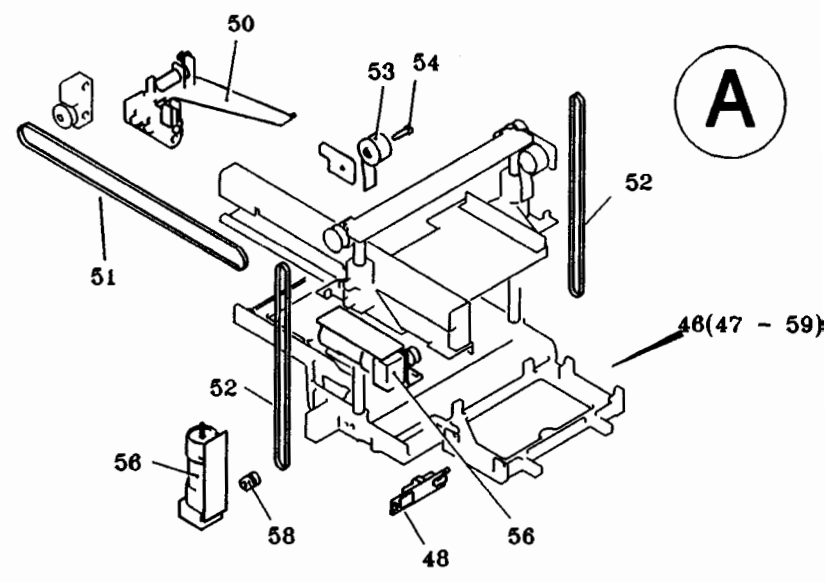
HP 35401 Exploded View (sheet 2 of 3)
